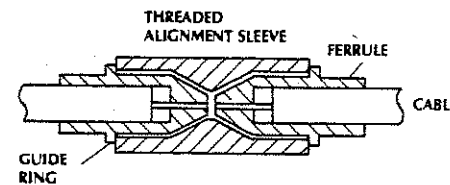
Tapered-sleeve connector. Caps fit over the ferrules, rest against the guide rings, and screw onto the threaded sleeve to secure the connection.
